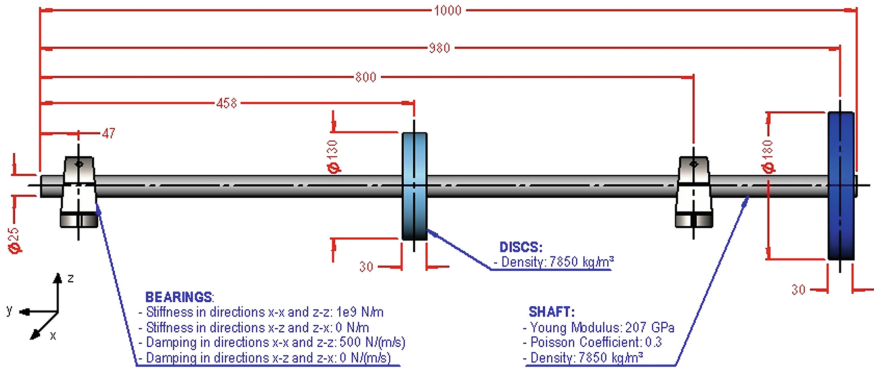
Rotor geometry used for all types of angular VDN tested.
